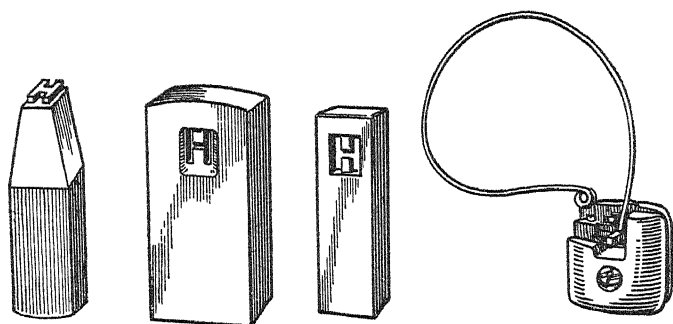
PUNCH, "STRIKE," MATRIX AND HAND-CASTING MOULD.
